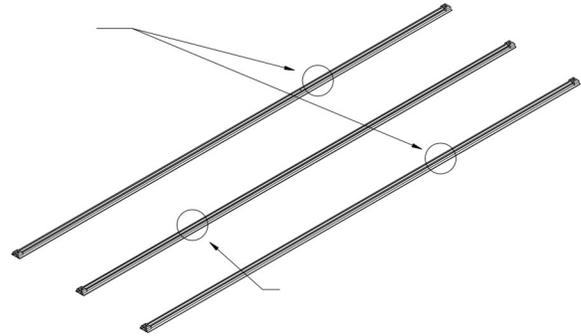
Surface tracks must be shimmed level using the 1/16" and 1/8" shim strips provided, eliminating carriage drift
